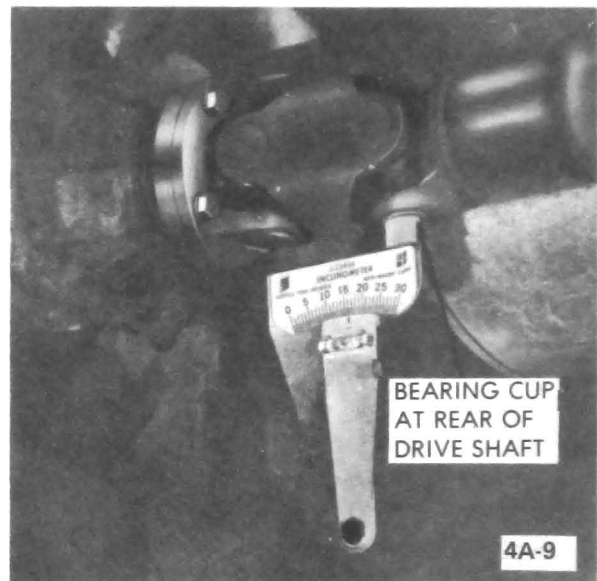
A-9 - Measuring Angle at Rear of Propeller Shaft
